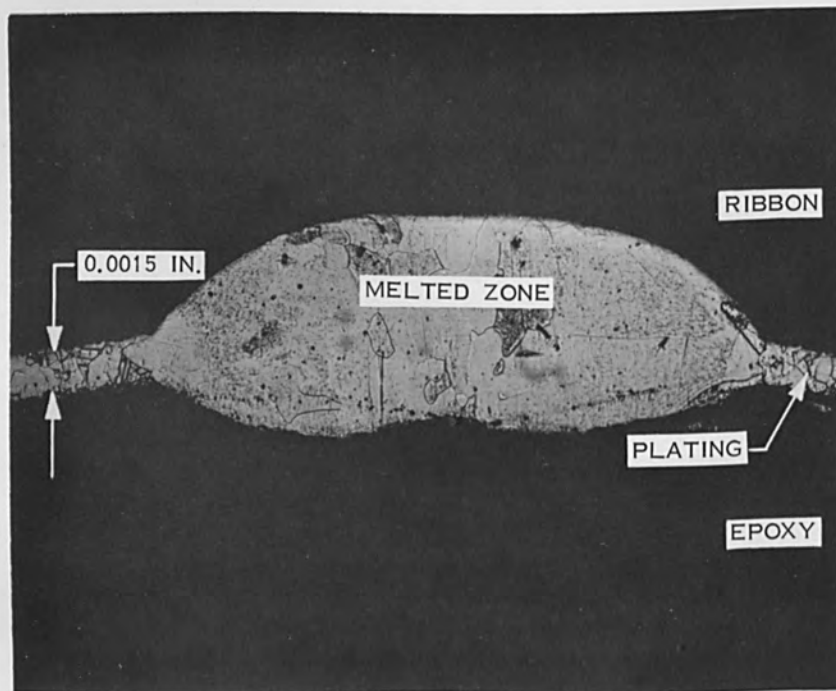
OMEC End-Weld (Motherboard) Assembly
